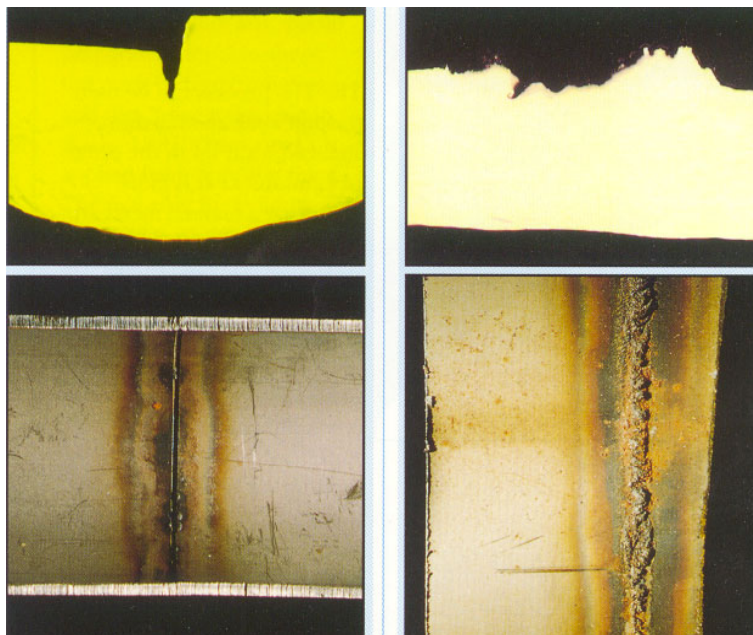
Examples of bad welding. Left: misalignment and lack of penetration. Right: Lack of gas shielding.
